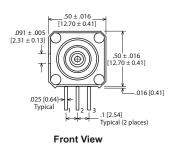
SHA: Triple Potentiometer or RS, Solder Hooks, 1/4" Dia. Bushing
